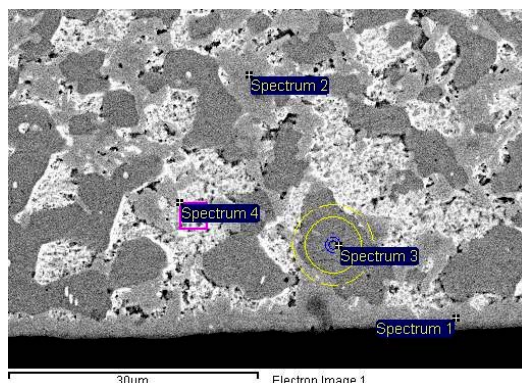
Section of the Cracked Joint, with Close Up of Solder Attached to the Circuit Board Pad, (2200X).
